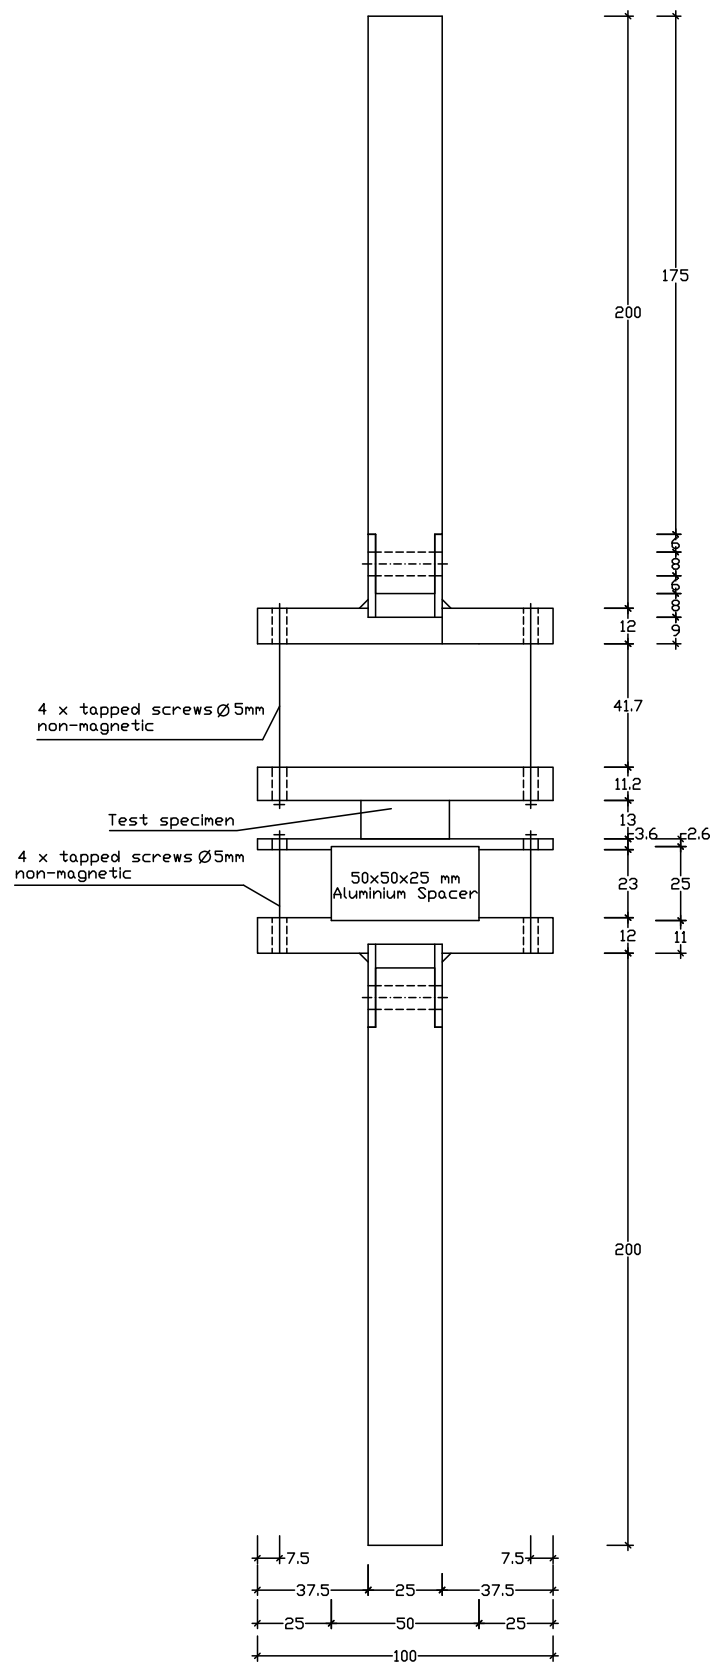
Technical drawing of the compression setup without magnetic induction.
